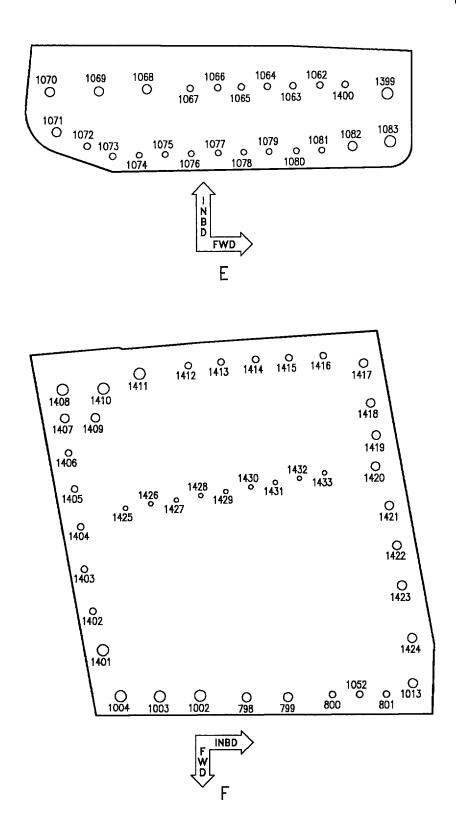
Inner Wing Skins Hole Numbers (Sheet 4)
